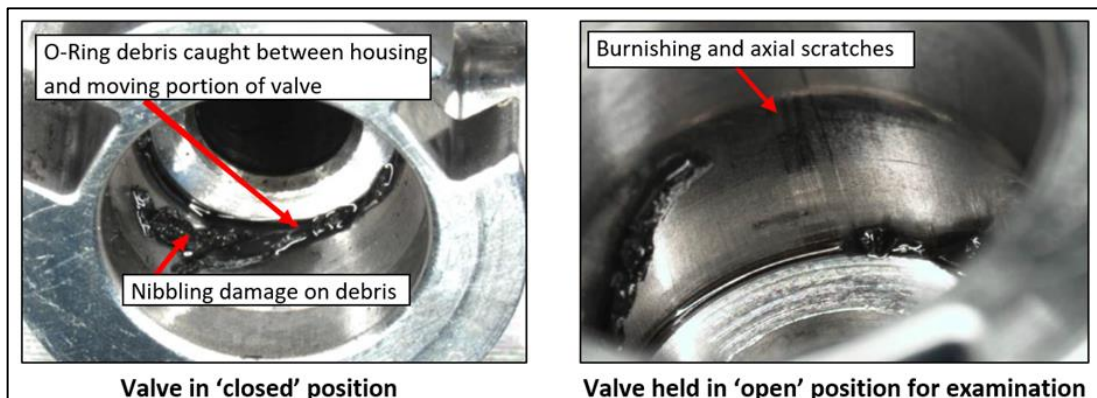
Debris within the housing, and burnishing and axial scratches (Adapted from Engine Manufacturer's report)
